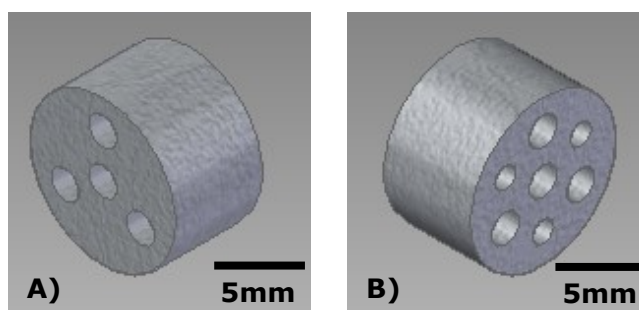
Fiber Optics Holder a) Front, b) Back
